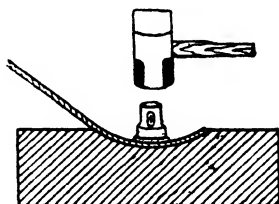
BENDING THE END OF A PLATE ON A HOLLOW BLOCK
